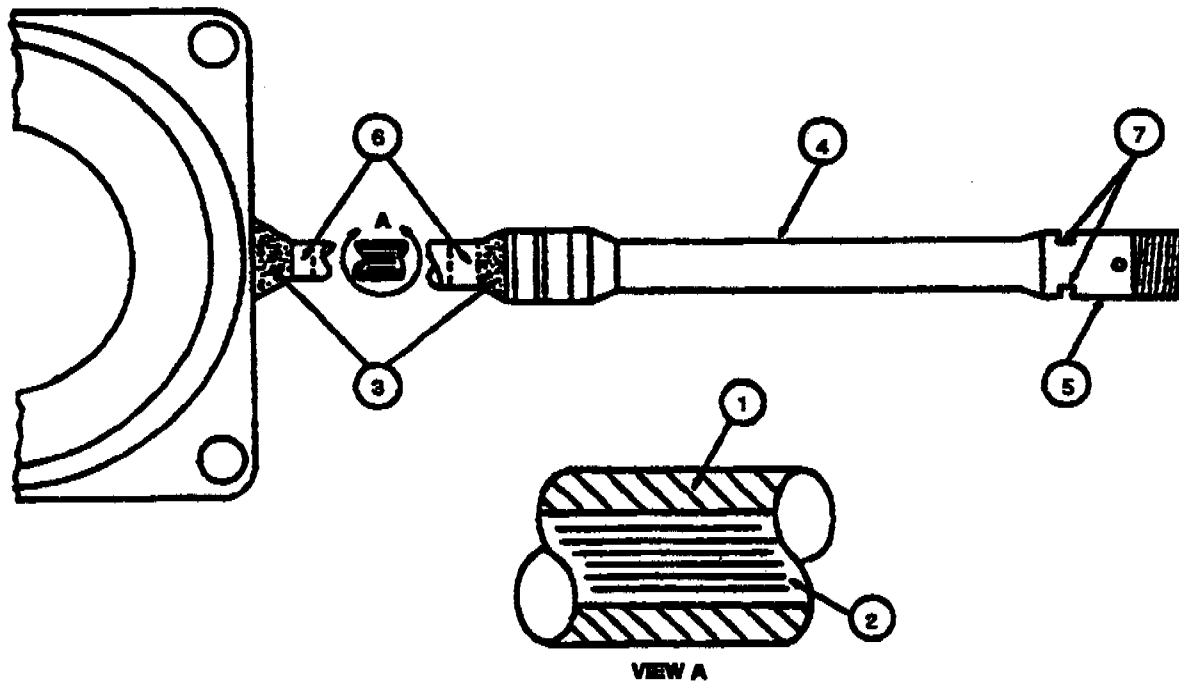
Air Shrink Tubing, Repair and End Sealing of T53-L-701,-701A, TQM Head Assembly.
